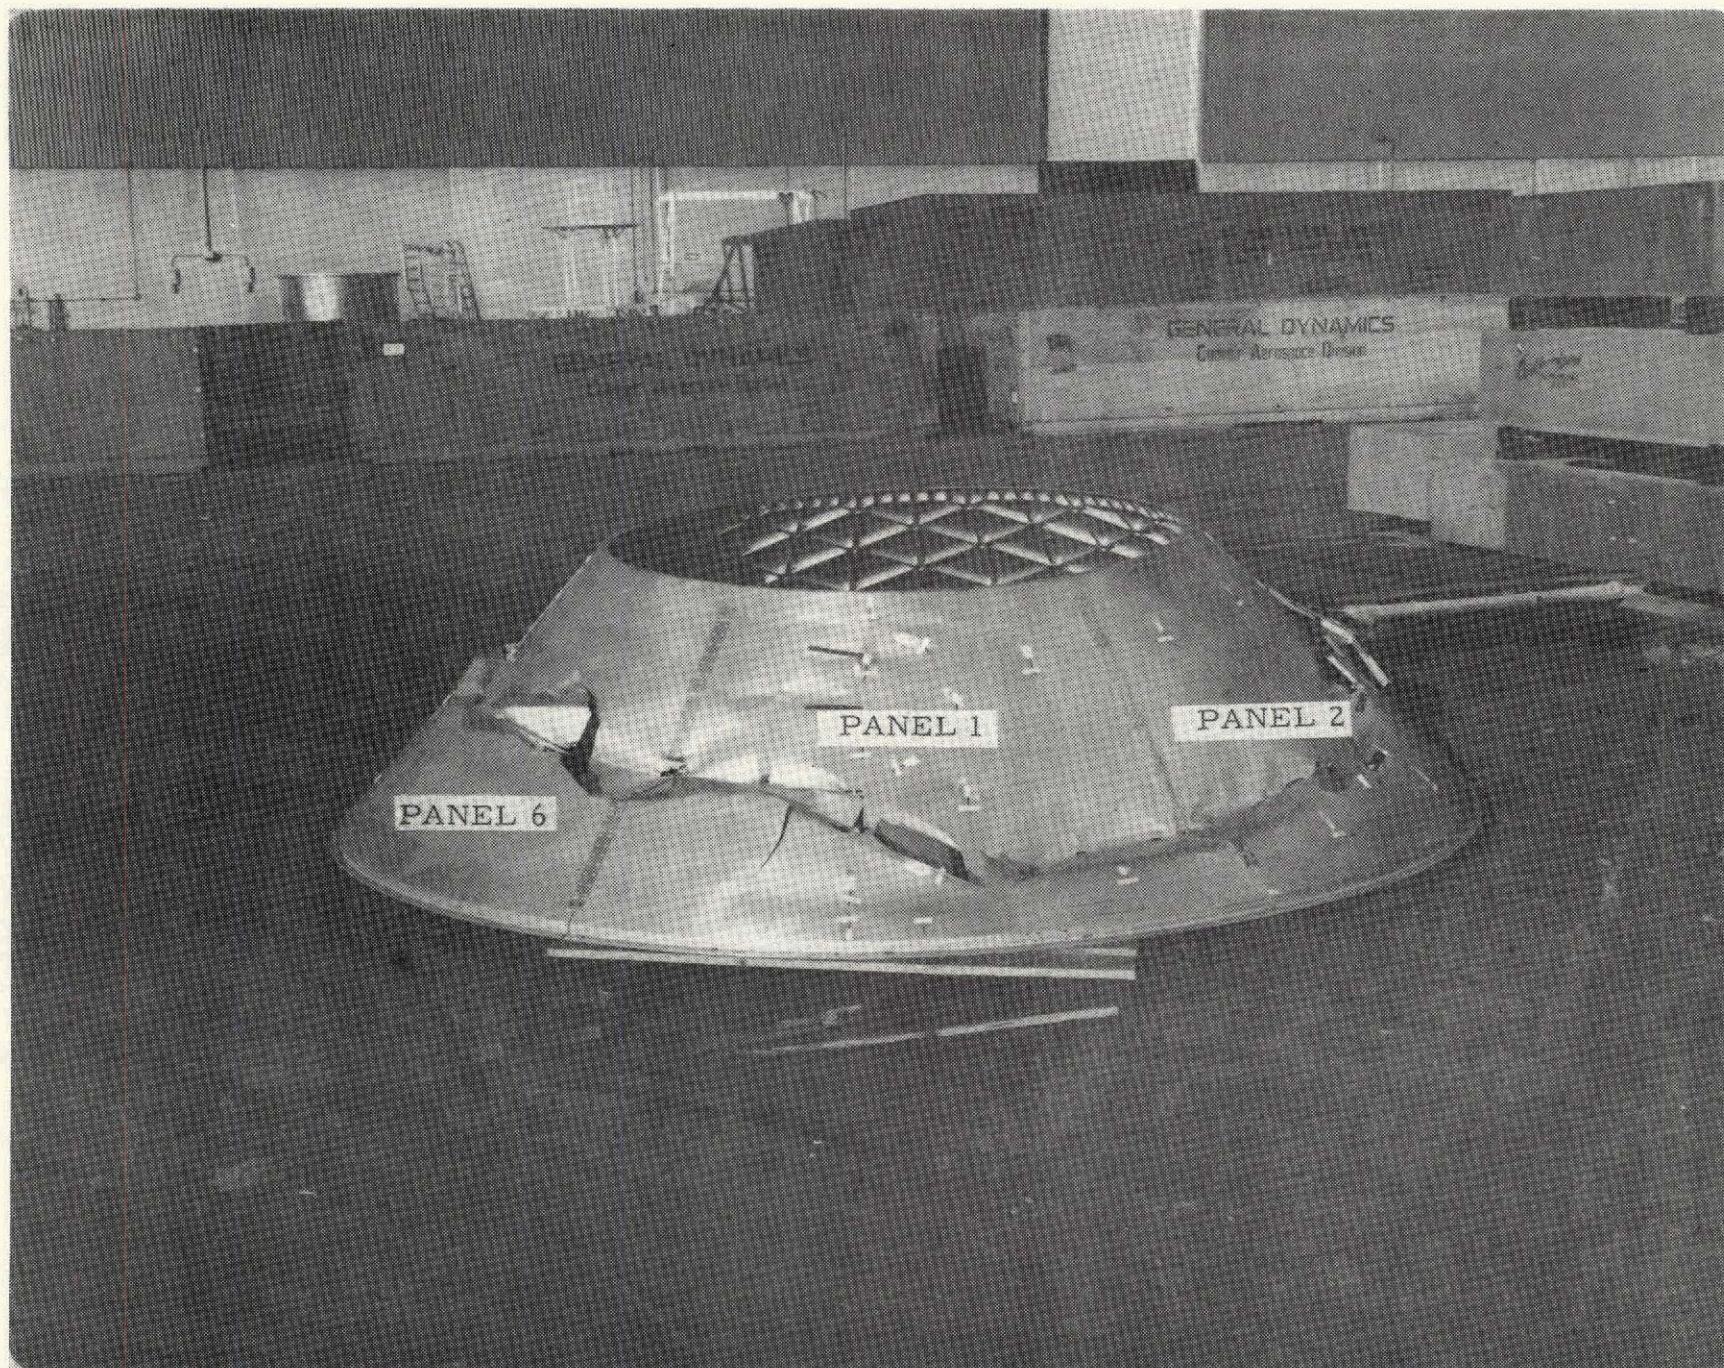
FAILED TEST SPECIMEN- PANEL 1
